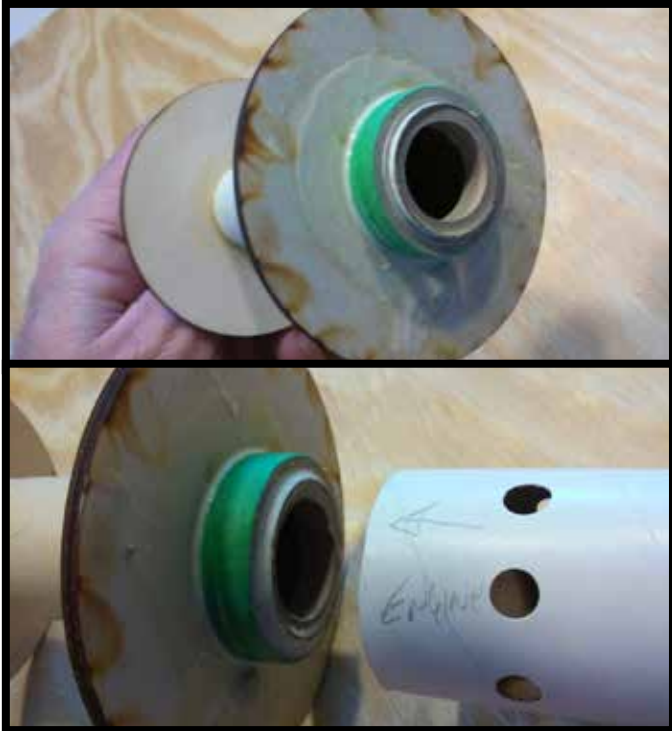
Place a centering ring on the edge of the motor mount tube and then place the flute tube over that.
